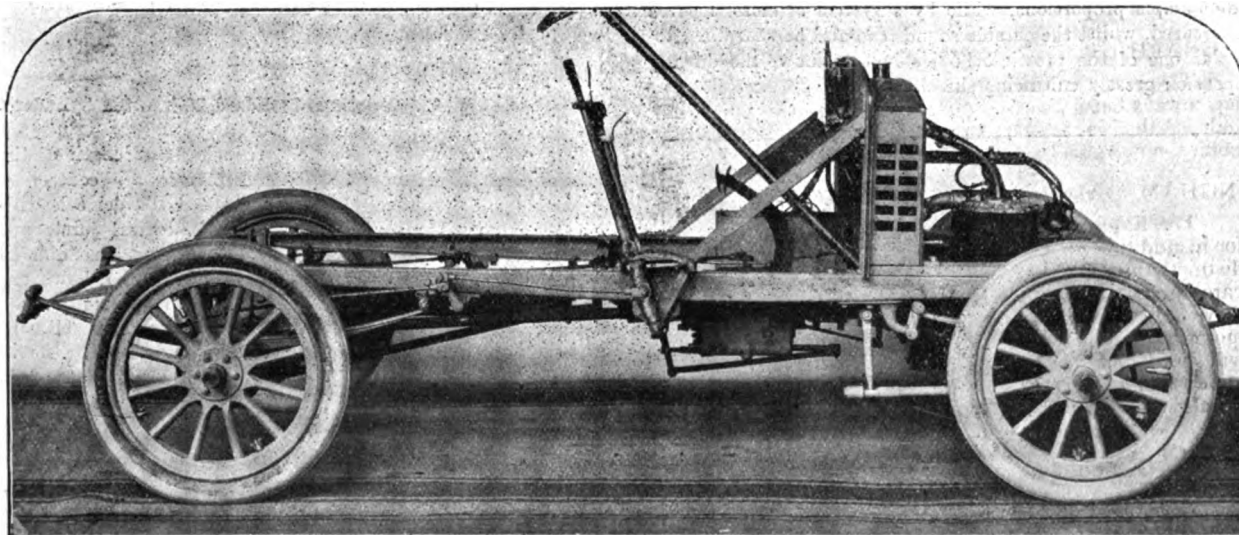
Chassis of Staines-Simplex 10-h.p. Car.
